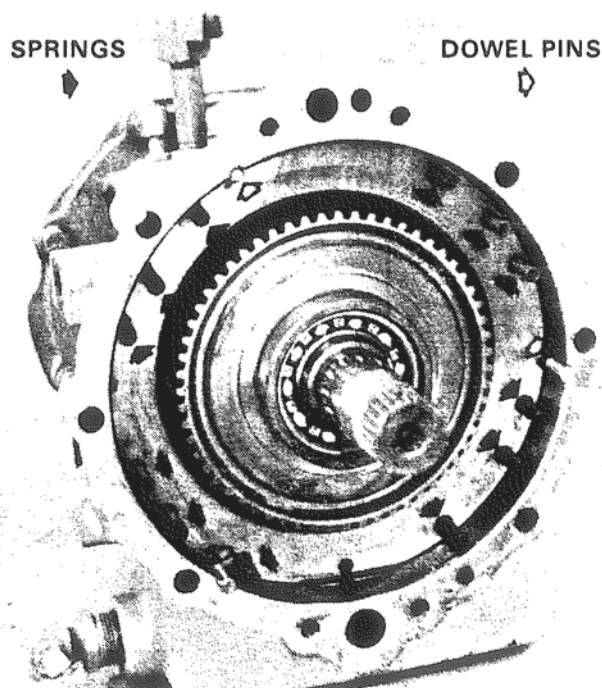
Installation of Twelve (12) Pressure Plate Springs and Three (3) Dowel Pins.
